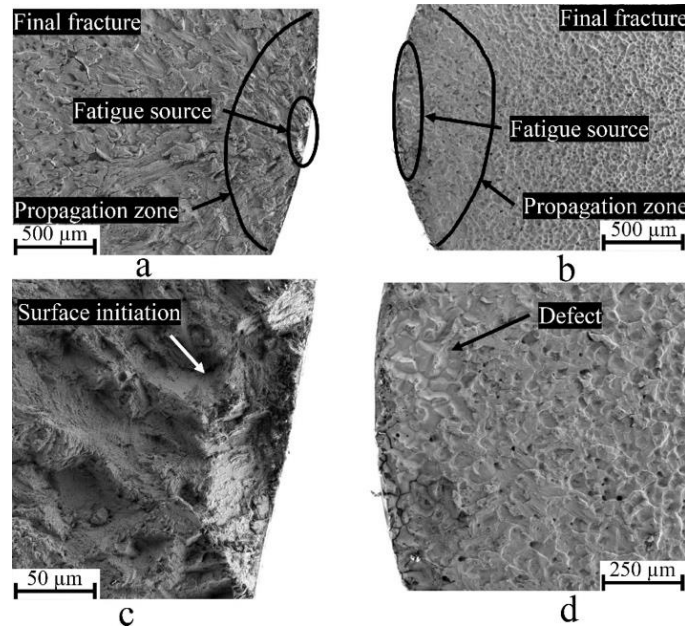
Fracture surfaces of (a) defect-free and (b) defect-bearing joints; (c) enlarged view of (a) fatigue crack initiated from the sample surface; (d) enlarged view of (b) fatigue crack initiated from the joint defect. Both samples are from batch 7 (OPS)
